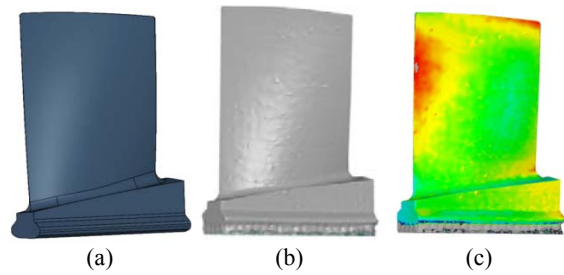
Aircraft engine blade: a) CAD model, b) image obtained with a scanner, c) final result of matching the CAD model and the scan.
